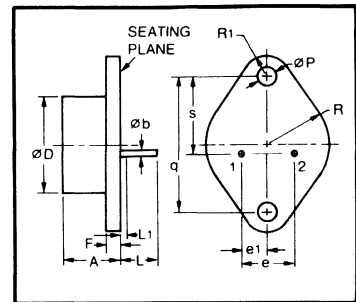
DIMENSIONAL OUTLINE JEDEC TO-204MA (Formerly JEDEC TO-3)
